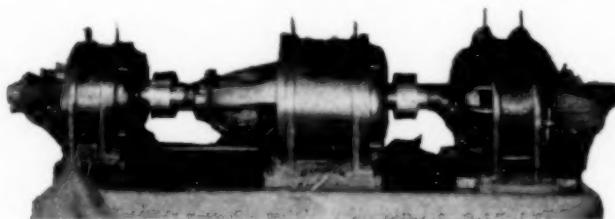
SELF-REGULATING WELDING GENERATOR
